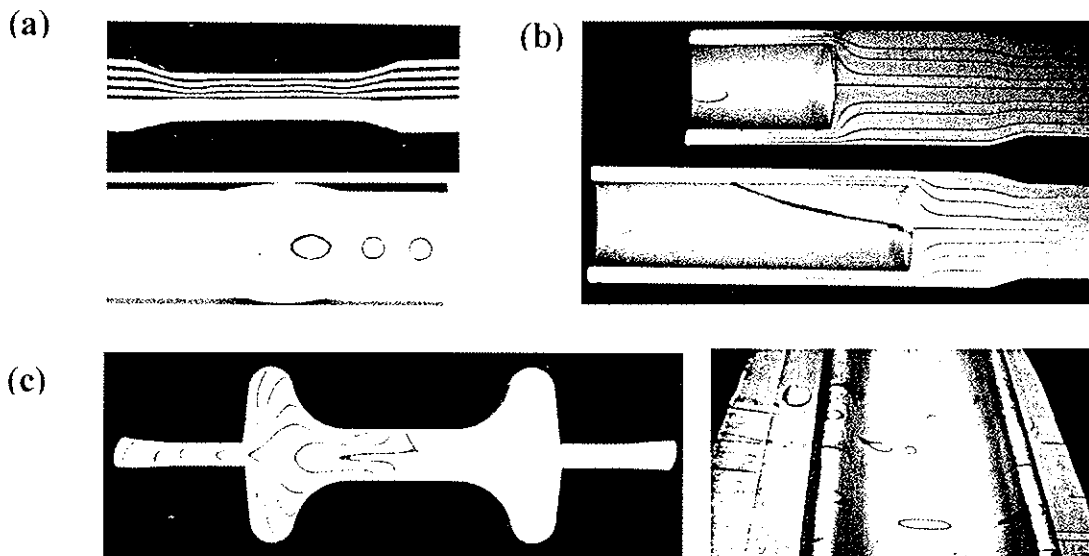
(a) Grid pattern to investigate friction conditions in plane strain compression [UYU 03], (b) Grid pattern to investigate friction conditions in backward cup extrusion [UYU 03], (c) Internal grid and surface pattern used in hot forging of aluminium [NOL 03a, NOL 03b].
